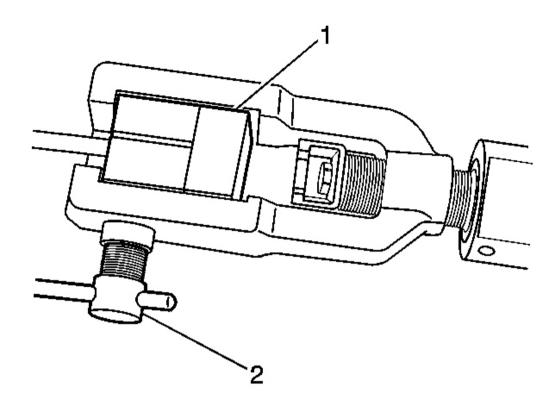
View Of Pipe Flaring Tool J 45405 Courtesy of GENERAL MOTORS CORP.
